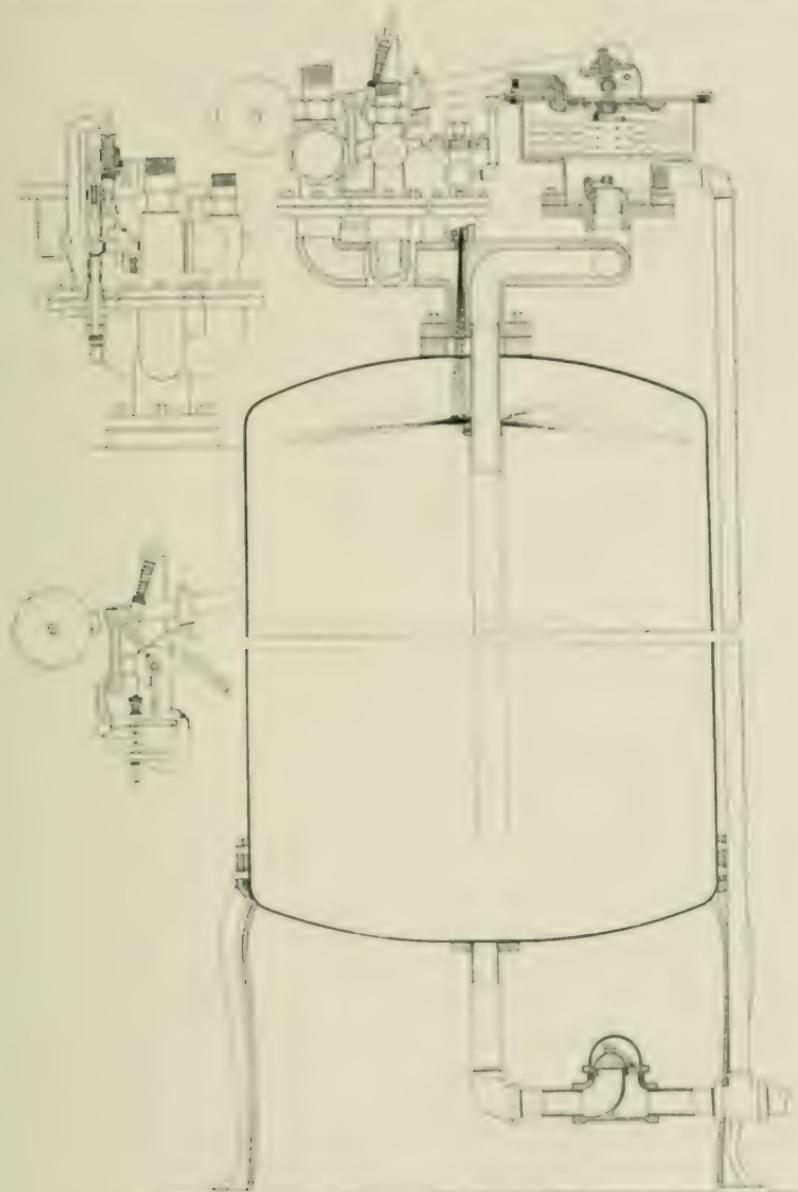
Section of "Spark" exhauster. By Automatic Vacuum Co.
